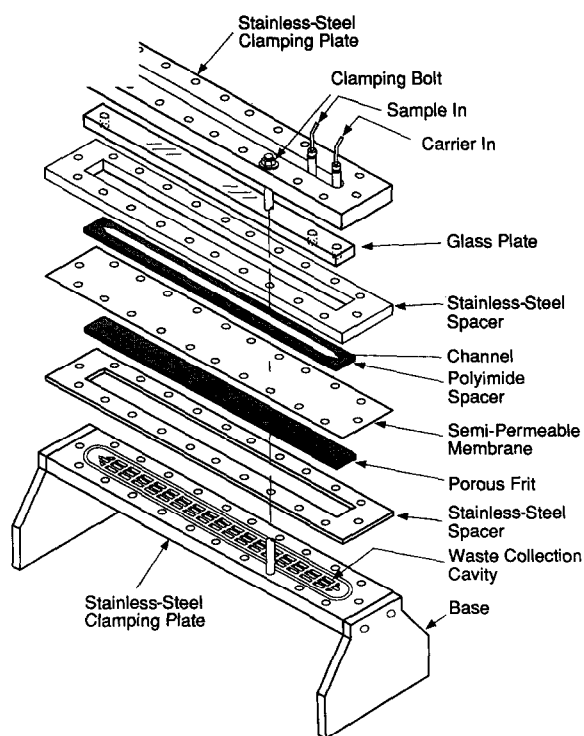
Asymmetric FIFFF channel assembly: exploded view.
